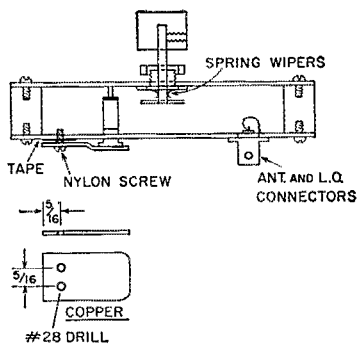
Cut-away view of the radial cavity mixer assembly in the 1296-Mc. converter.
